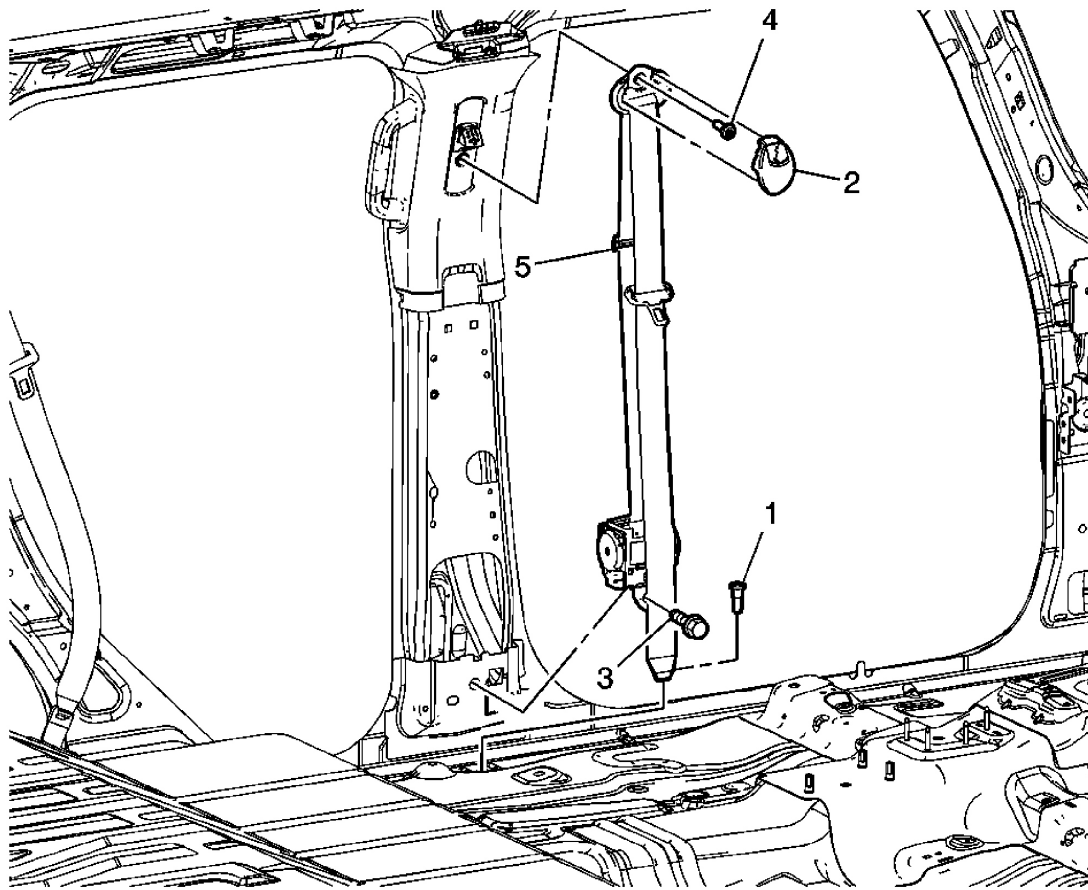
Seat Belt Retractor Pretensioner Replacement - Front
